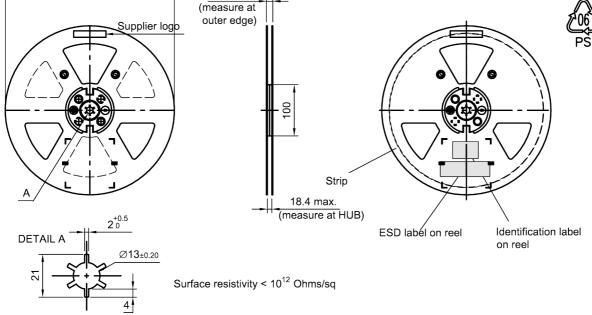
Drawing of reel (first-angle projection) with diameter of 330 mm.
